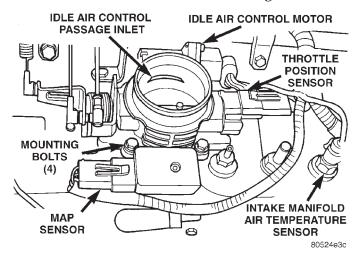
Throttle Body and Sensor Locations—4.0L Engine
